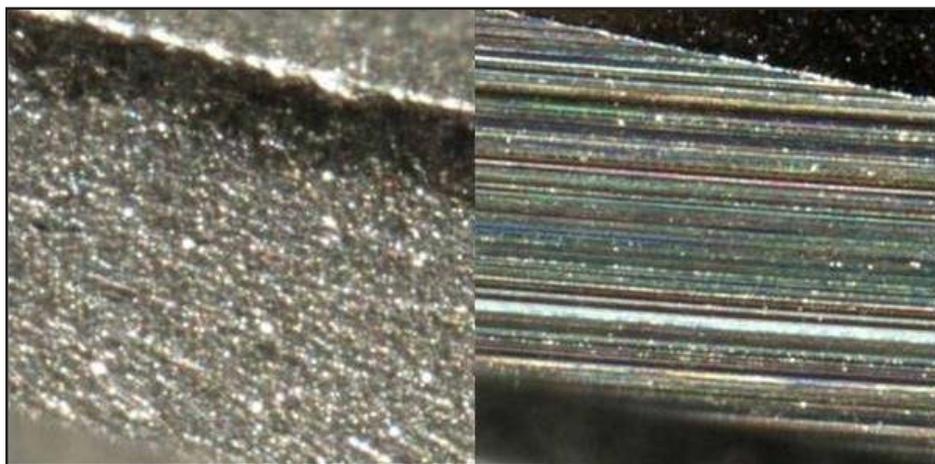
Lapped surface: (left) ground surface; (right) 20x magnification.
